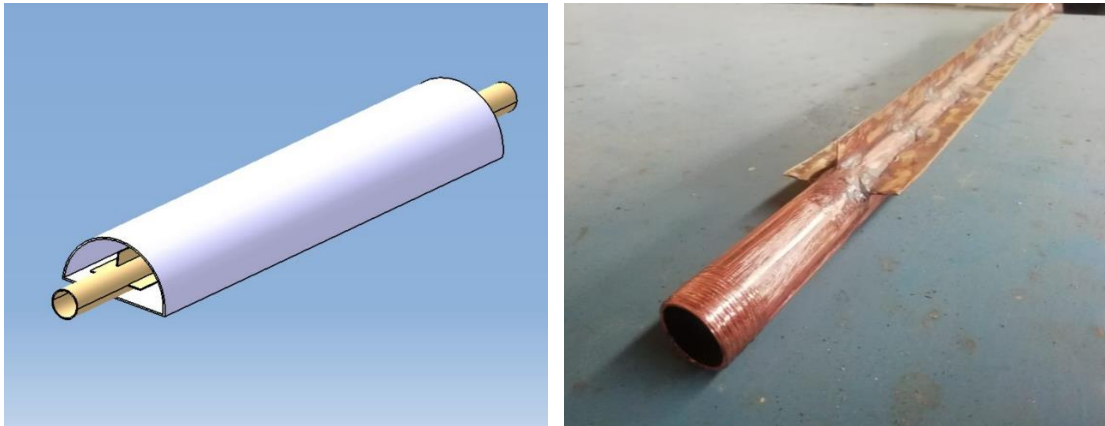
3-D View of semi-circular shell and finned tube ($\theta = 90^\circ$)
